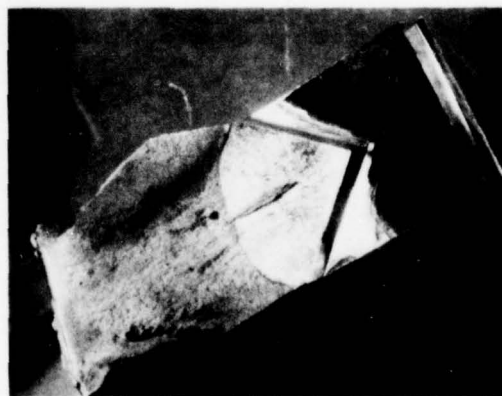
Fracture Surface of 7475-TMT2 Toughness Specimen 1324.
